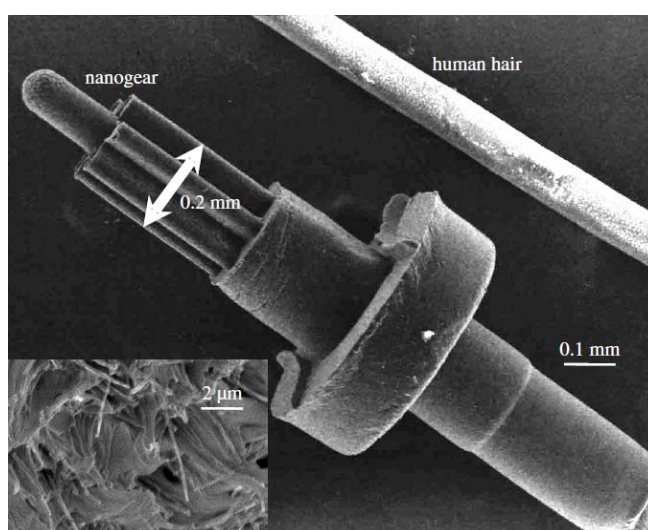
SEM image of the smallest CNTs/nylon working gear [26].
